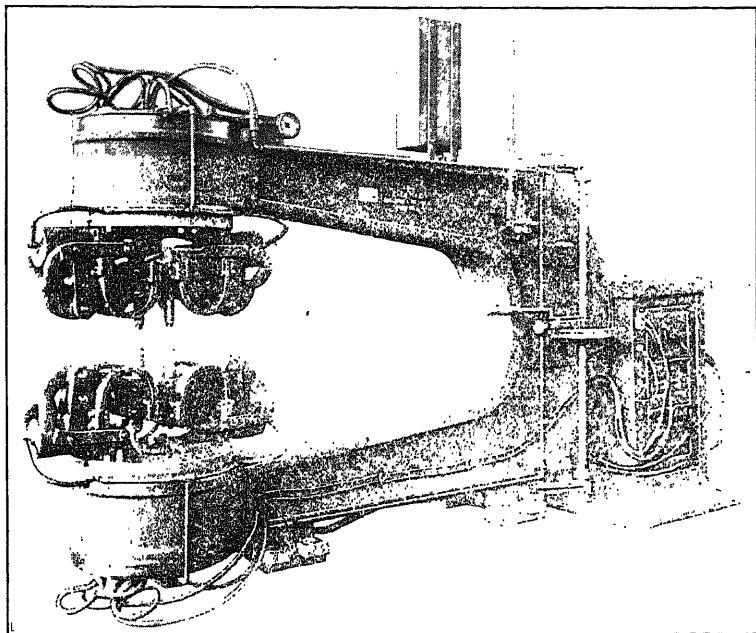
Federal Rotatable Head Two-spot Welding Machine.
